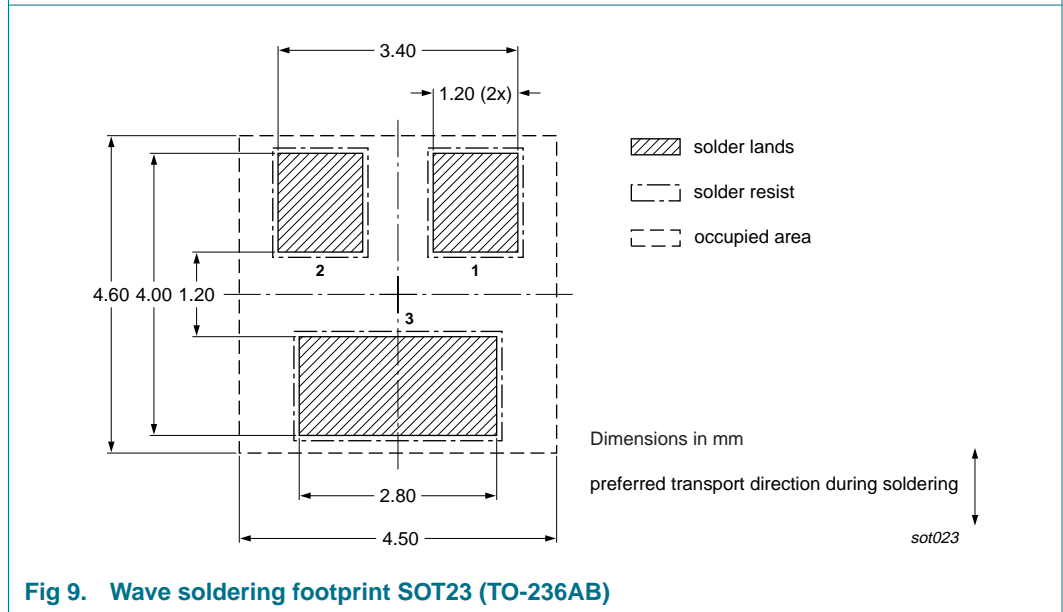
Wave soldering footprint SOT23 (TO-236AB)
